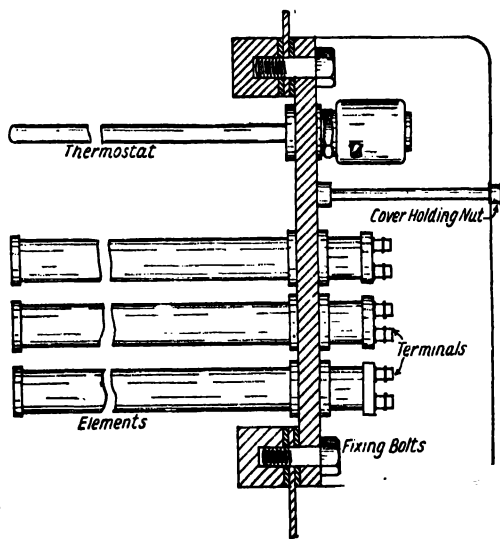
Removable element immersion heater: spirals of nickel-chrome enclosed in steatite or porcelain bobbins which slide into drawn copper tubes.
